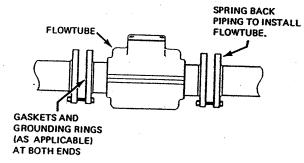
Installing Flanged-Body Flowtube without Spool Pieces
